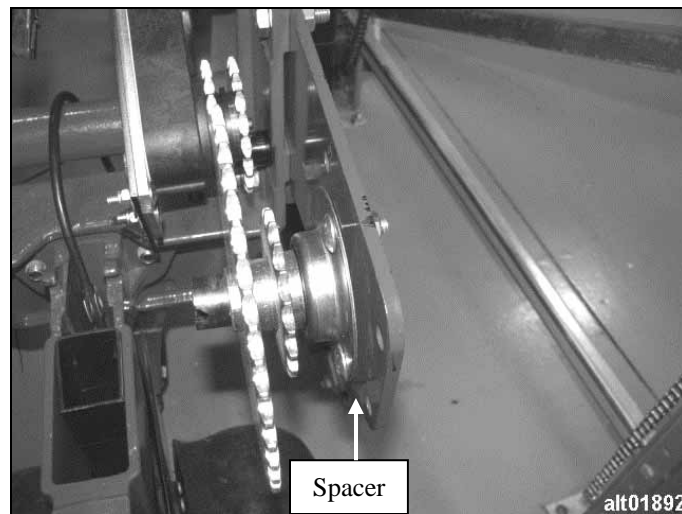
3/16 in. thick spacer installed between drive assembly and side plate
